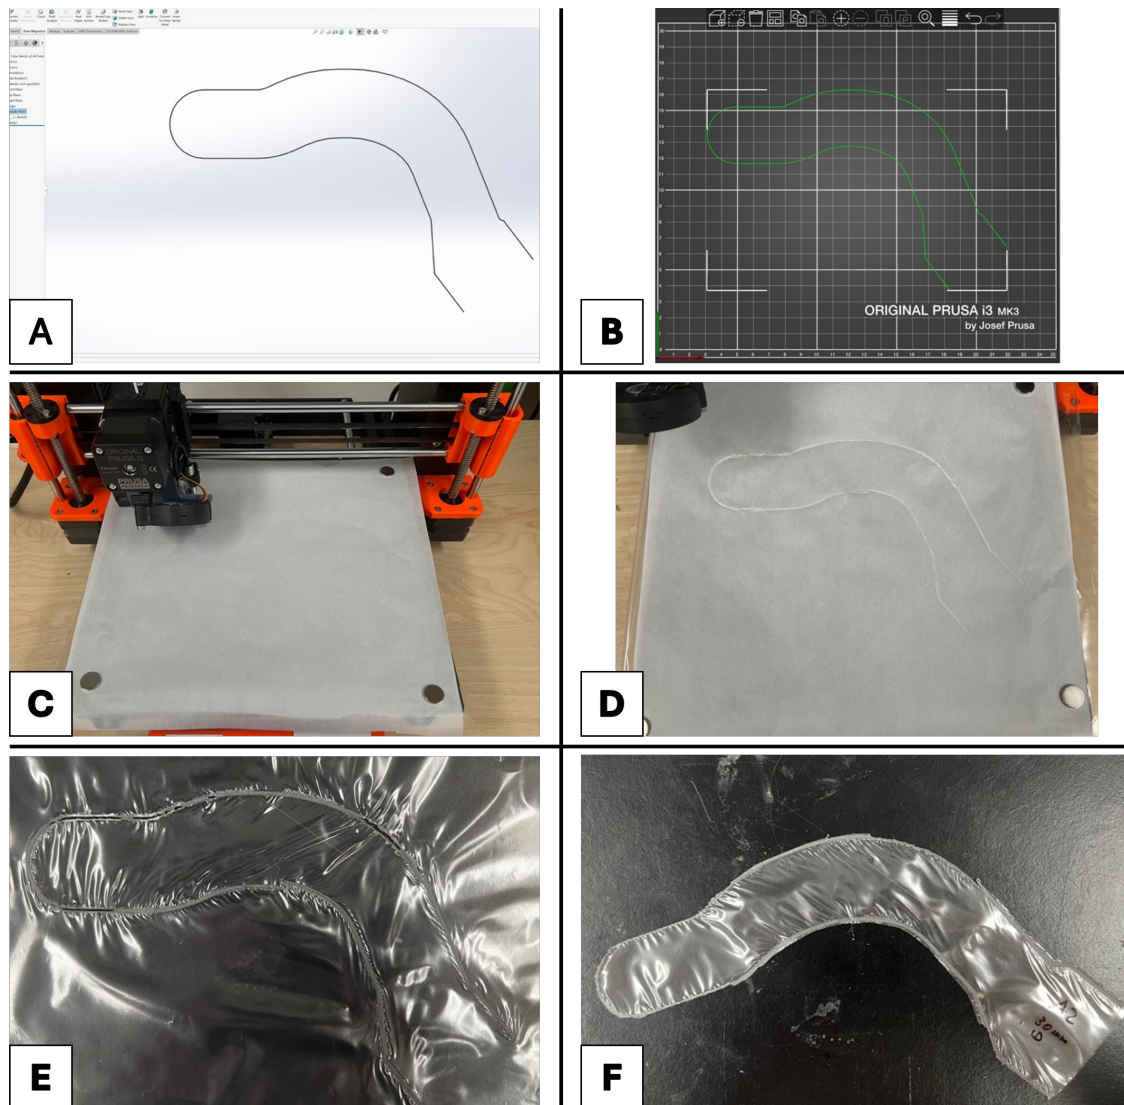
EAD-3 manufacturing process. A: Outline of desired seam in CAD. B: STL file of outline imported into PrusaSlicer. C: Sheets of TPU sandwiched between parchment paper on Pruska MKS3+. D: Sealing path of tube shape. E: Sealed tube before cutting. F: New tube after excess material is cut away.
